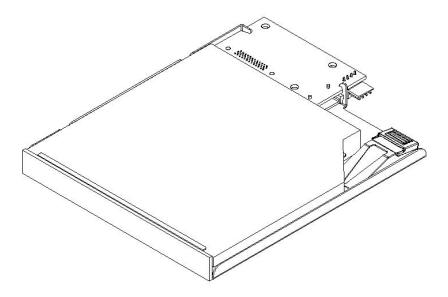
Optical Drive Carrier with SATA-to-IDE Converter Board
